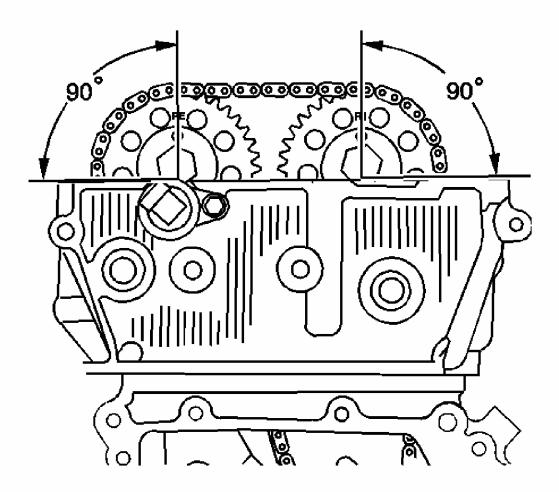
Ensuring Camshaft Sprocket Drive Pins Are At Top Of Their Rotation Courtesy of GENERAL MOTORS CORP.
